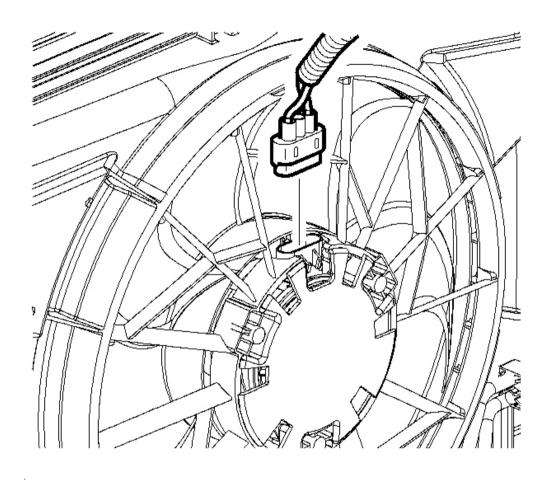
View Of Electrical Connector To The Fan Motor Courtesy of GENERAL MOTORS CORP.
